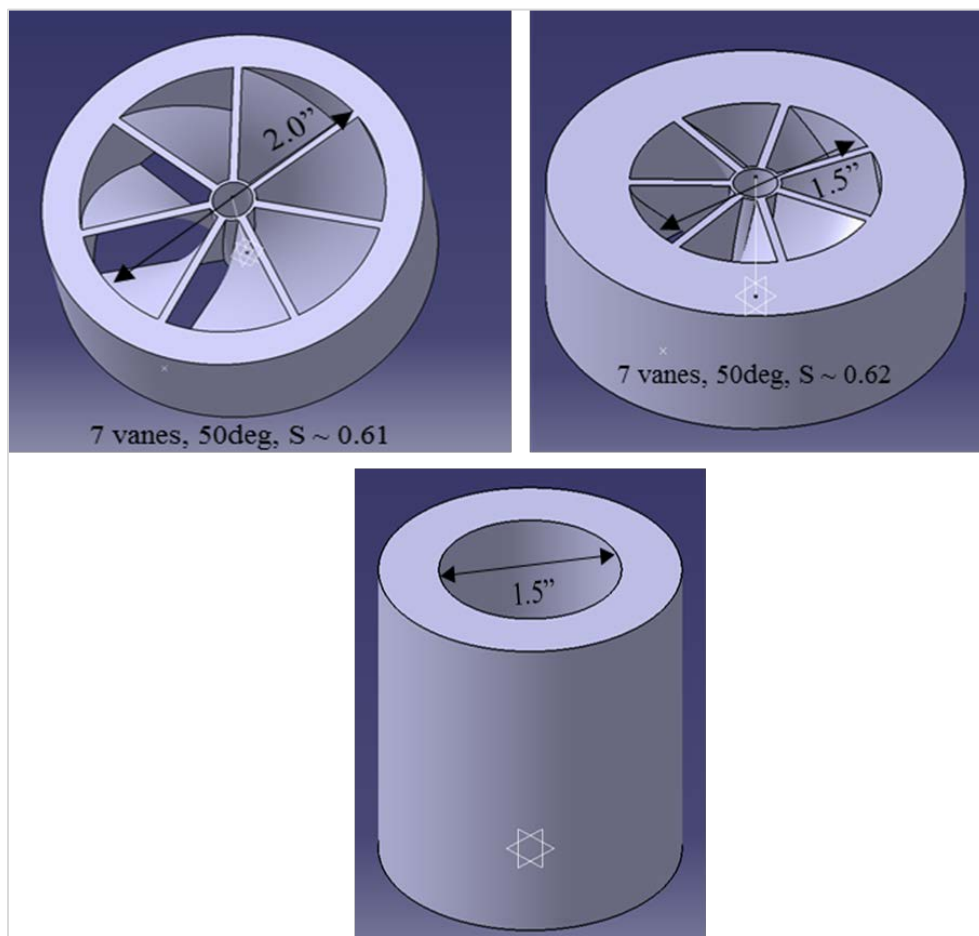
Final swirler designs and insert for the atmospheric pressure burner.
